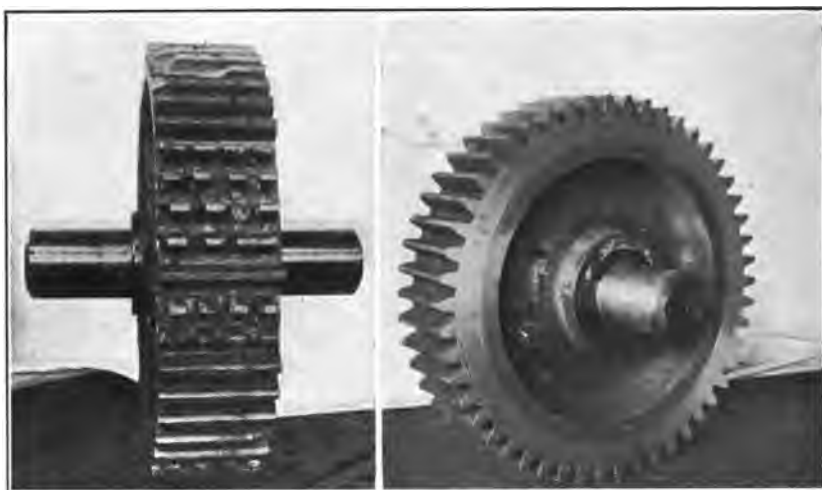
THE OLD AND NEW DRIVING GEARS FOR FRAME PLANER. THE ONE ON THE LEFT IS THE ORIGINAL GEAR OF CAST-IRON. THE FAILURE OF THIS GEAR UNDER THE HEAVY DUTY IMPOSED BY HIGH-SPEED TOOLS IS SHOWN IN THE LARGE NUMBER OF BROKEN TEETH. THE NEW STEEL-RIMMED GEAR SUBSTITUTED FOR THE OLD ONE, IS SHOWN ON THE RIGHT. THE HUB IS OF CAST IRON AND THE RIM OF STEEL FORGED IN THE BLACKSMITH SHOP, AND SHRUNK ON. THE GEAR THUS MADE IS AS SERVICEABLE AS ONE OF ALL STEEL, AND MUCH CHEAPER.
